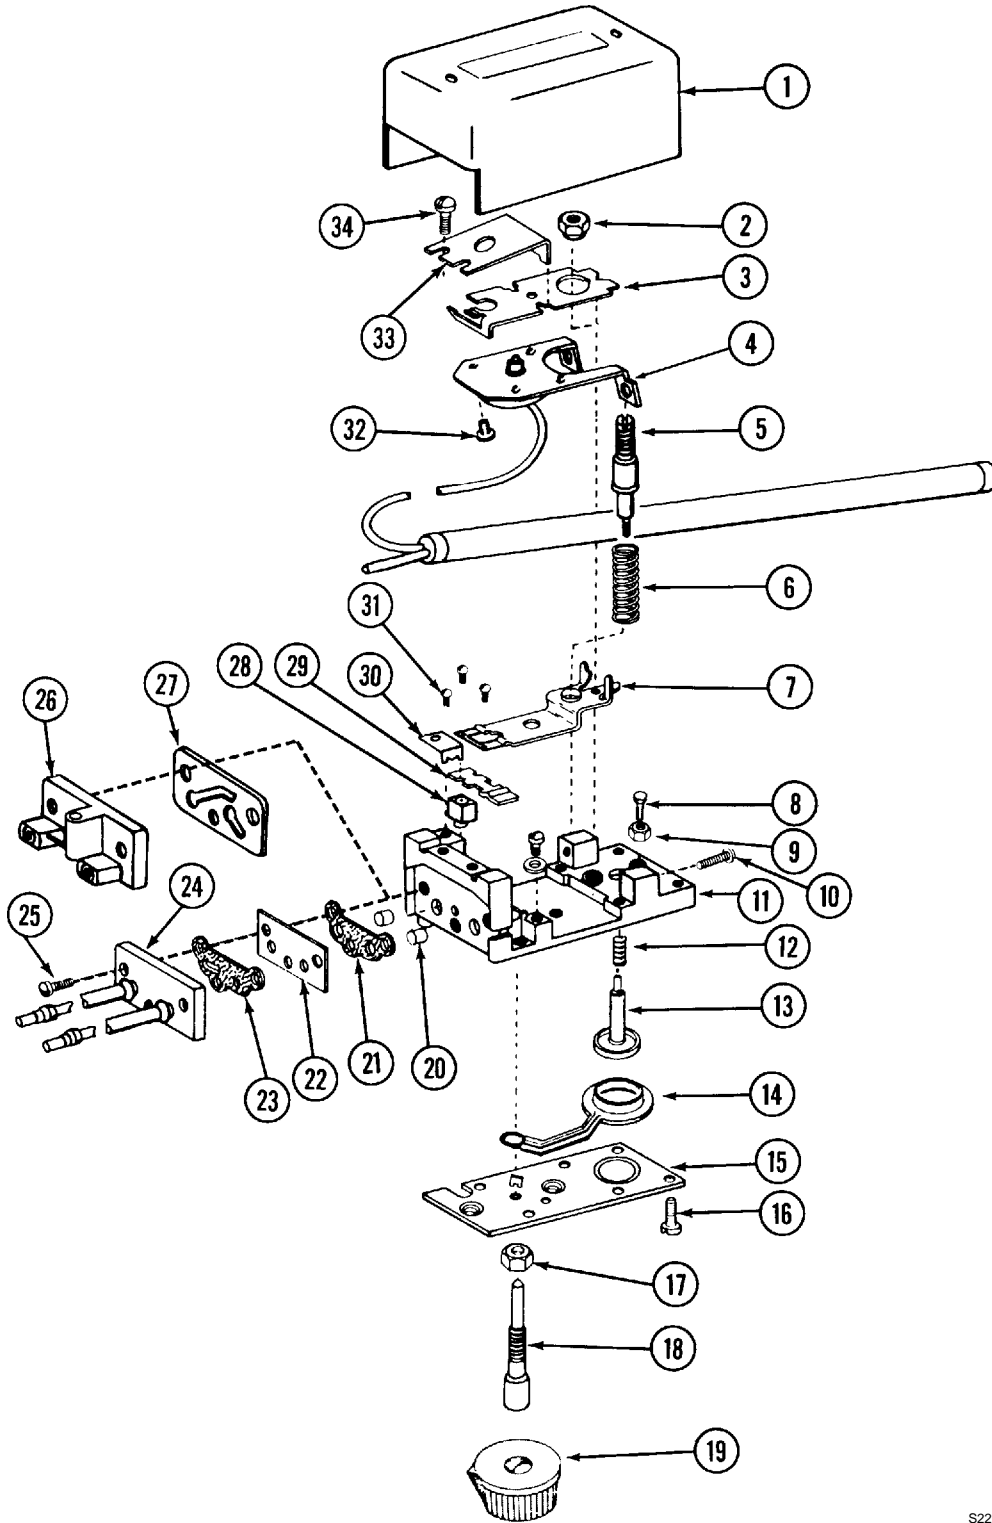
LP916A and C Exploded view (See Tables 2 and 3).
